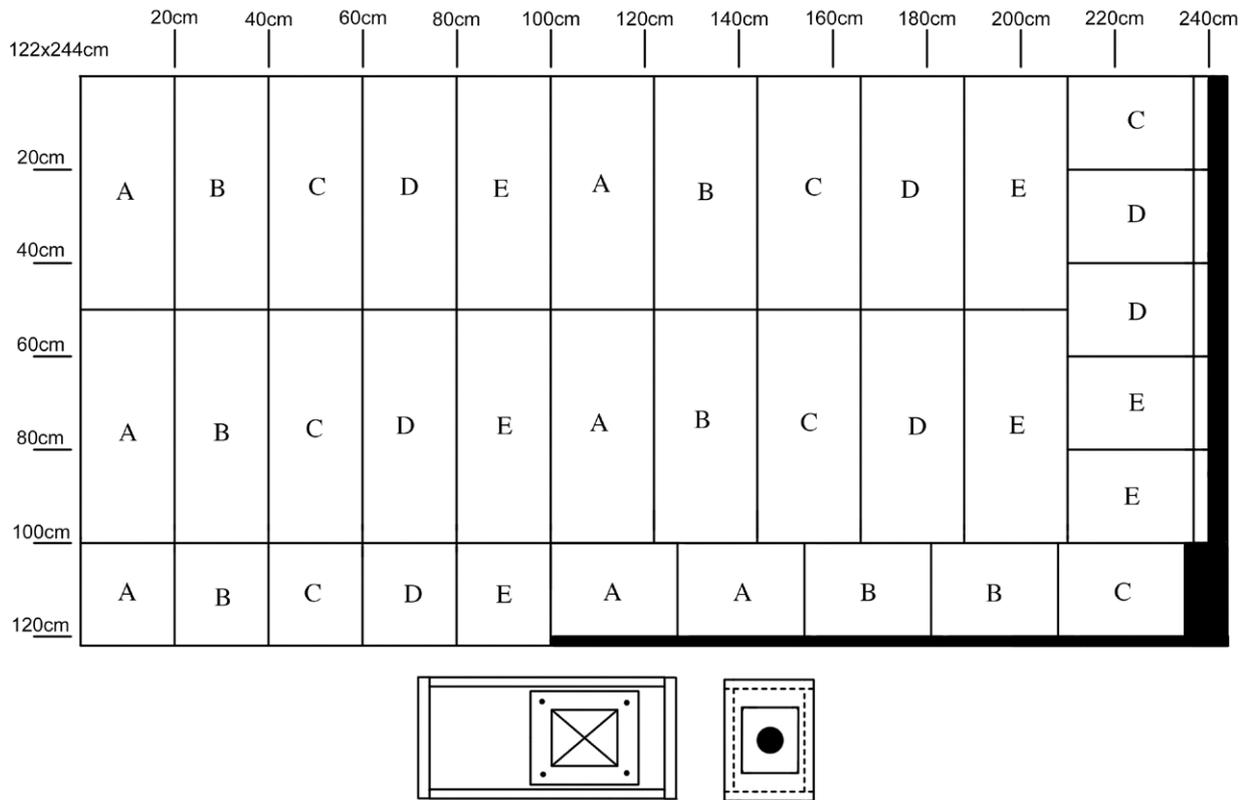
Plans for a slightly smaller nest box (five from a sheet of plywood).
